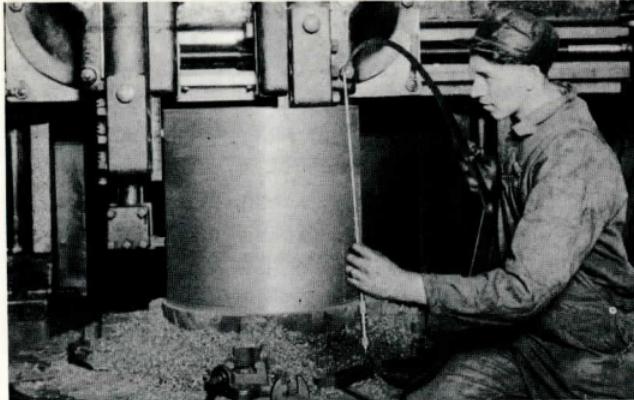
Pre-setting a large screw-adjusting Firm Joint Caliper to an inside Micrometer Caliper before checking progress of a cylindrical cut.
